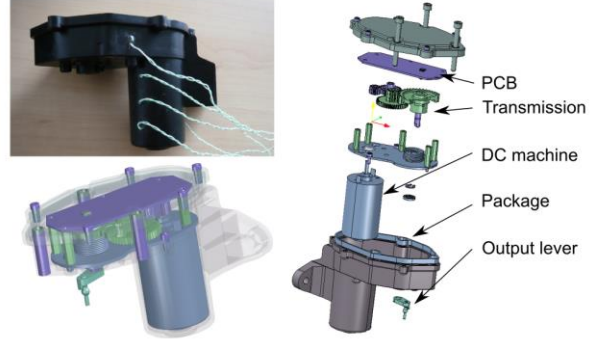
Top left: actuator with thermocouples inserted through the package. Bottom left: closed 3D drawing. Right: exploded view.
